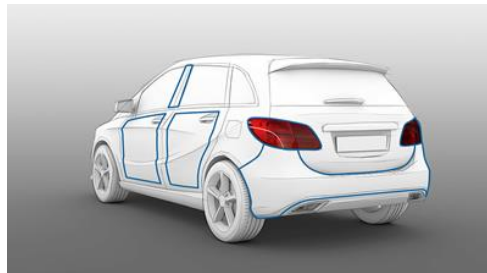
Even large plastic parts such as those in or on cars can be welded with laser technology.
